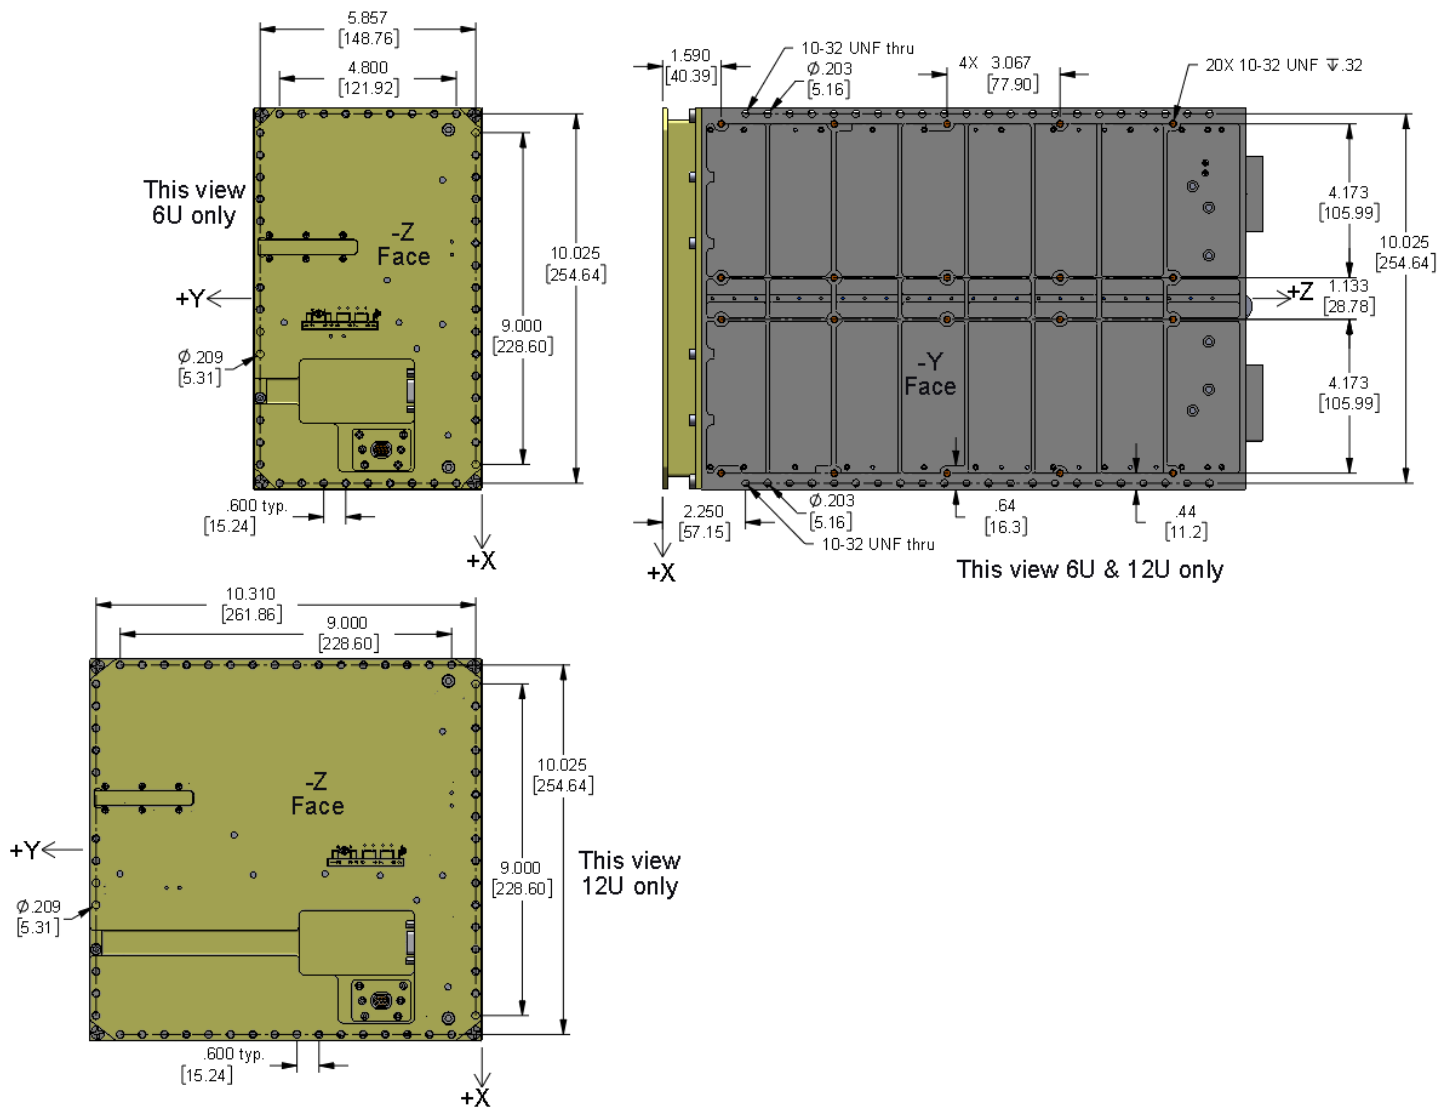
Mechanical interface dimensions unique to 6U and 12U
